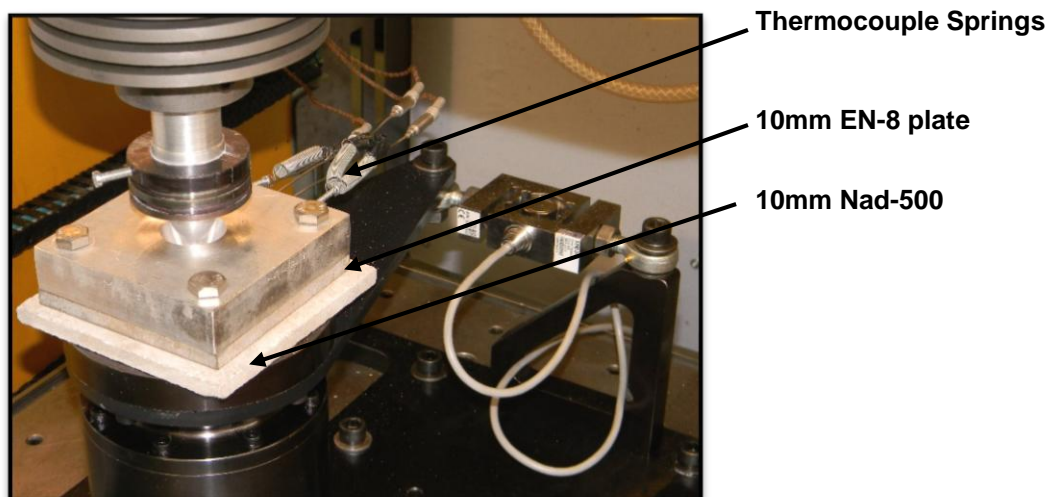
AA6082-T6 FTSW on PDS Welding Platform
